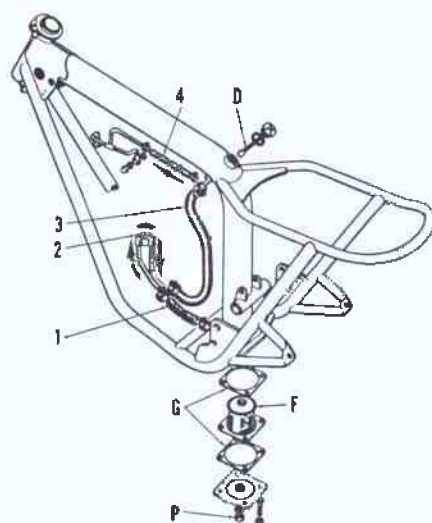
A—Drawing of engine oil lines typical of 750cc models. Frame tube is reservoir.
